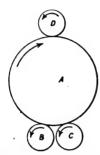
Diagrammatic view of rolled and ball bearings. A is the axle, B, C and D the rolls or balls.
